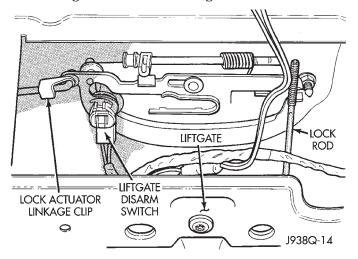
Lock Actuator Motor Linkage Remove/Install
